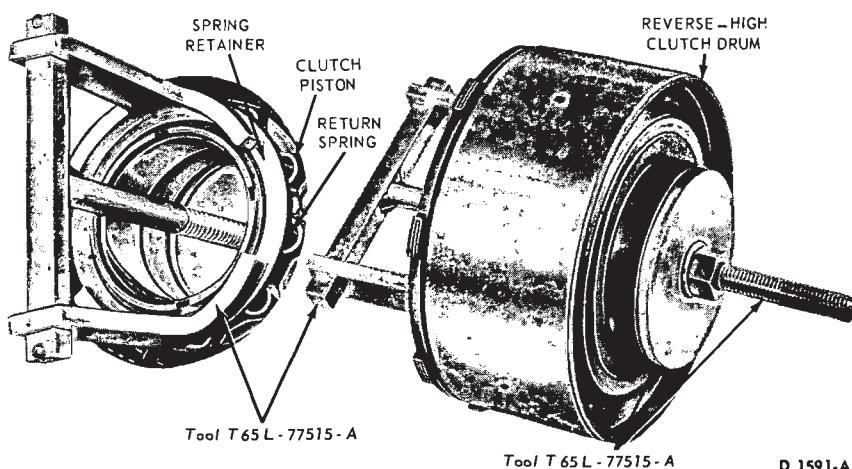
Removing or Installing Reverse-High Clutch Piston Snap Ring
